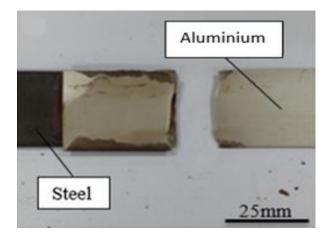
Failure location of brazed joint with 5 minutes wetting time after shear test.
